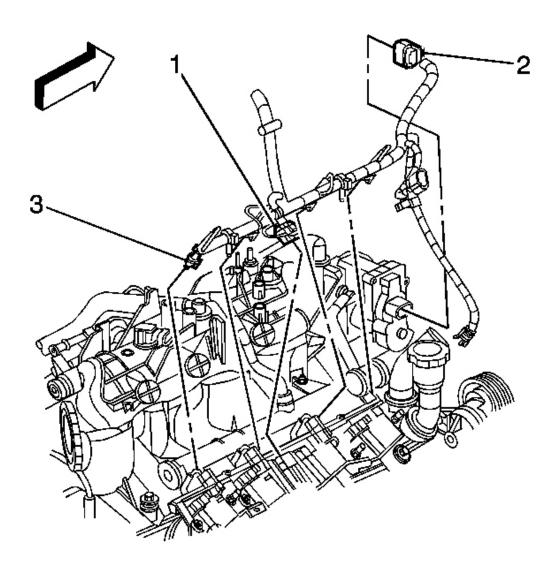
Locating Electrical Components At Top Of Engine Courtesy of GENERAL MOTORS CORP.
